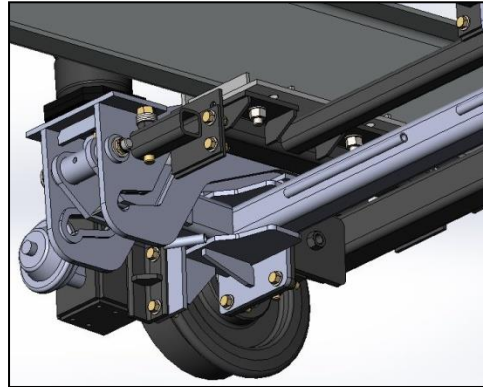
Rear Hi-Rail Unit Mounted (Bottom)
